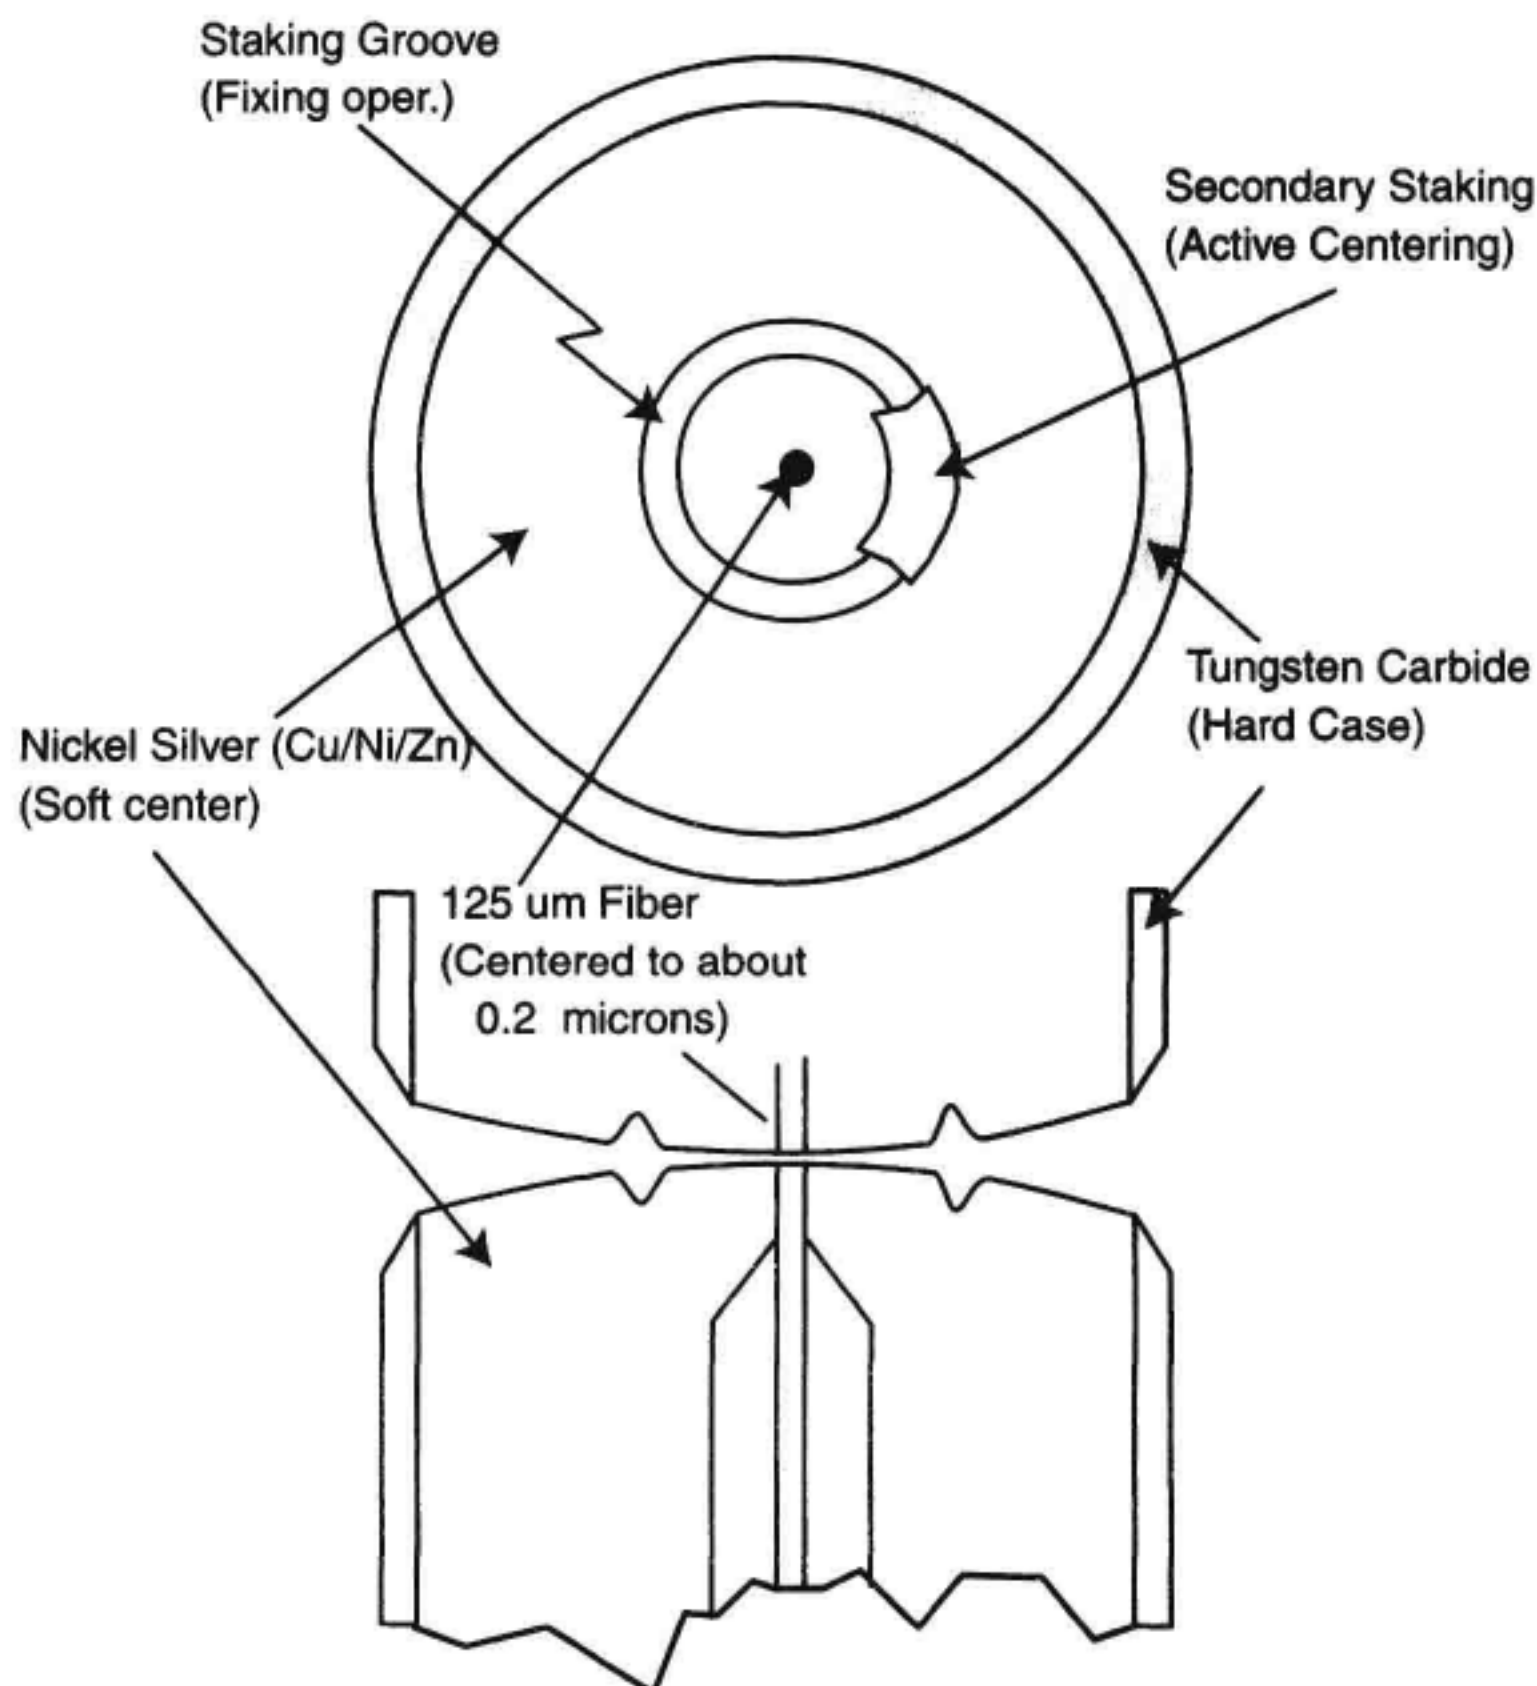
Construction details of an instrument grade (Diamond HMS-10).
